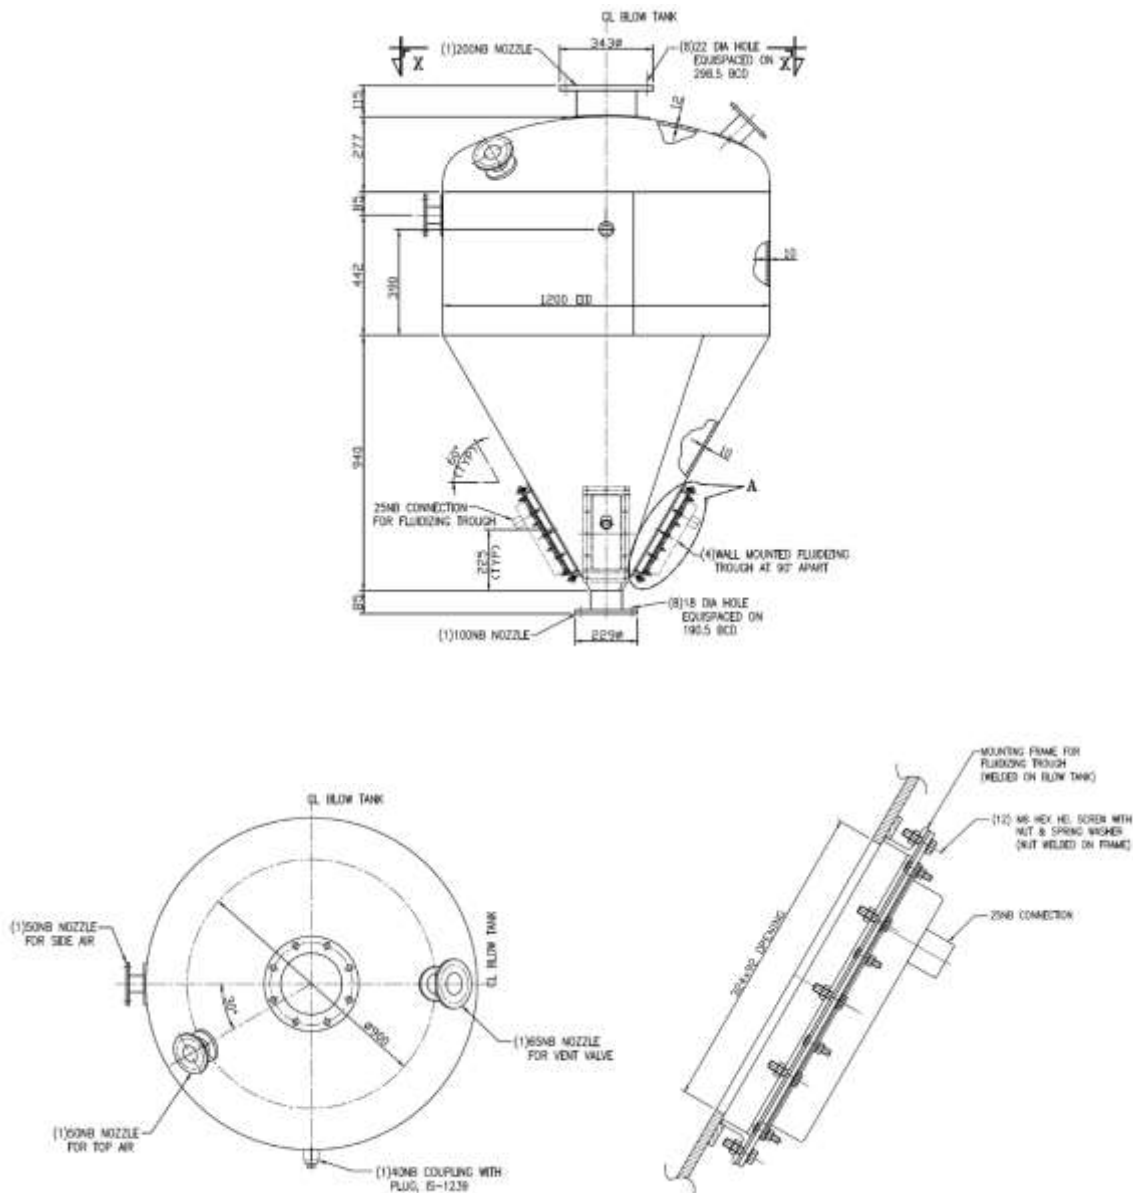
Design drawings of the blow tank feeder and trough type fluidizer
